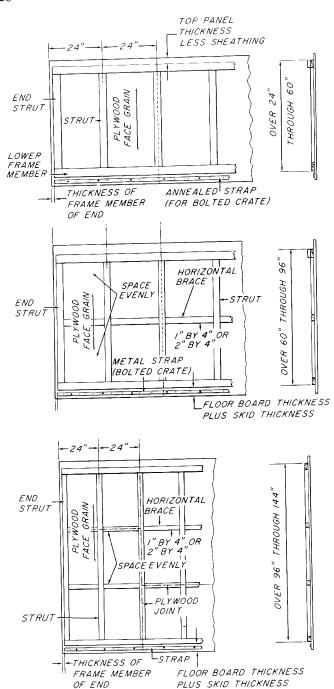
Side panels for plywood-sheathed crates of three heights.
